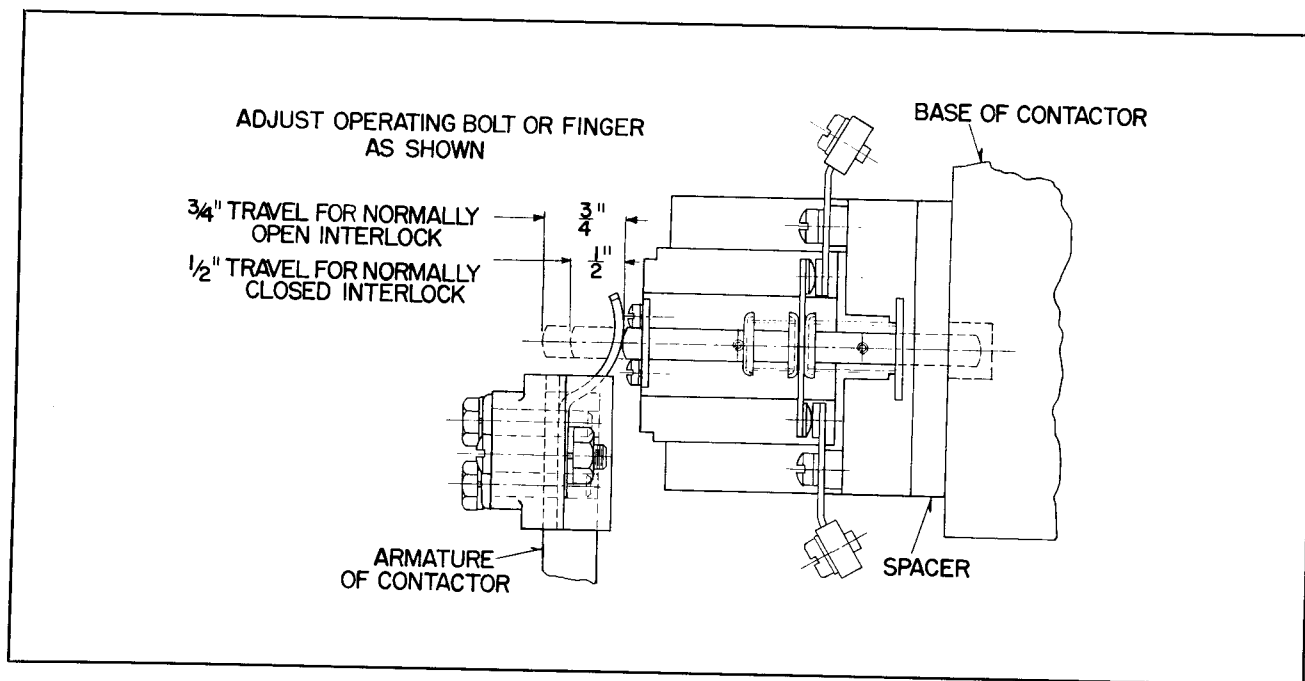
Cutaway View of Type L-62 Interlock for Spring Closed Contactors M-601, M-701 and Magnet Closed Contactors M-610, M-710
